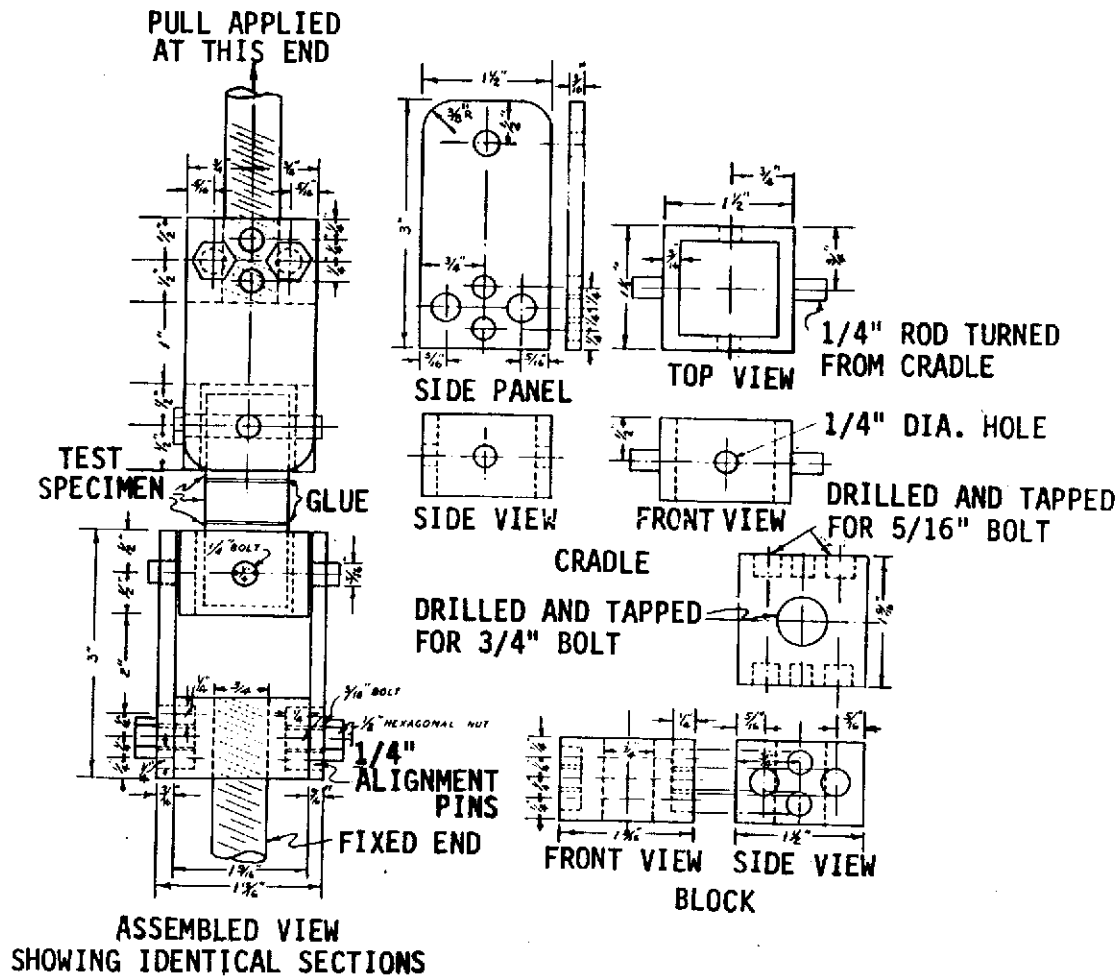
Loading Fixture for 1-in. Square Test Specimen for Tension Flatwise Test
